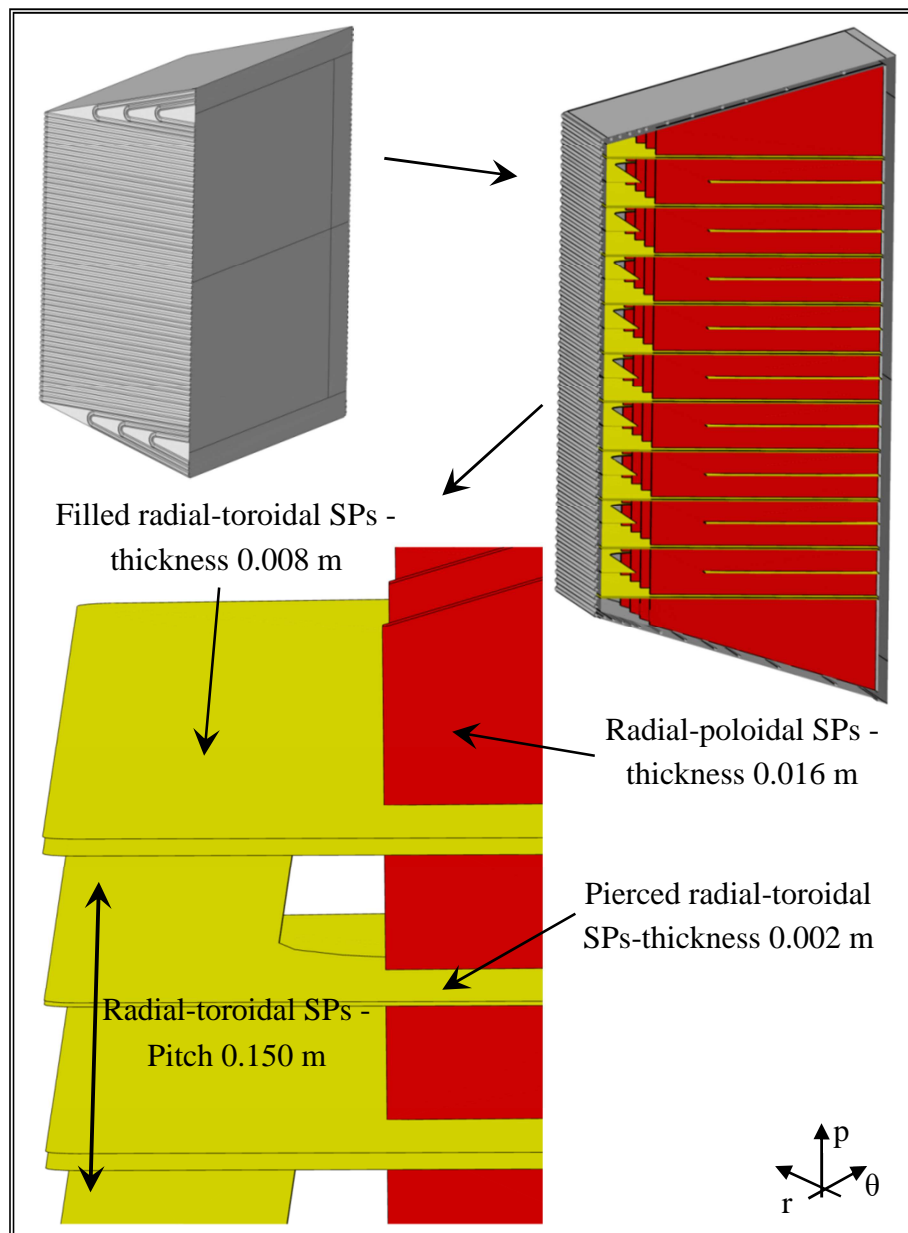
Configuration 6 - 3D geometric model exploded view.
